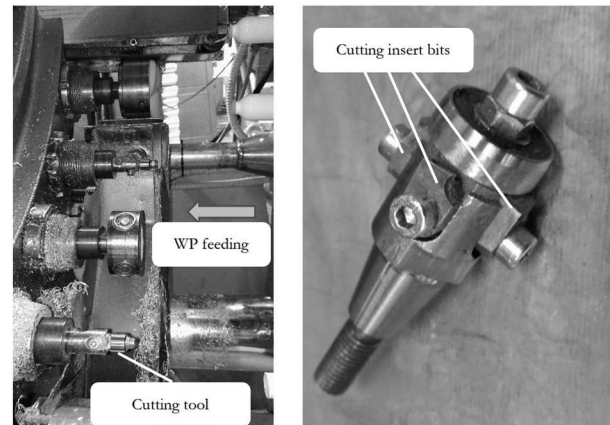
Detail of the shaping drum and the cutting tool with cutting bits
